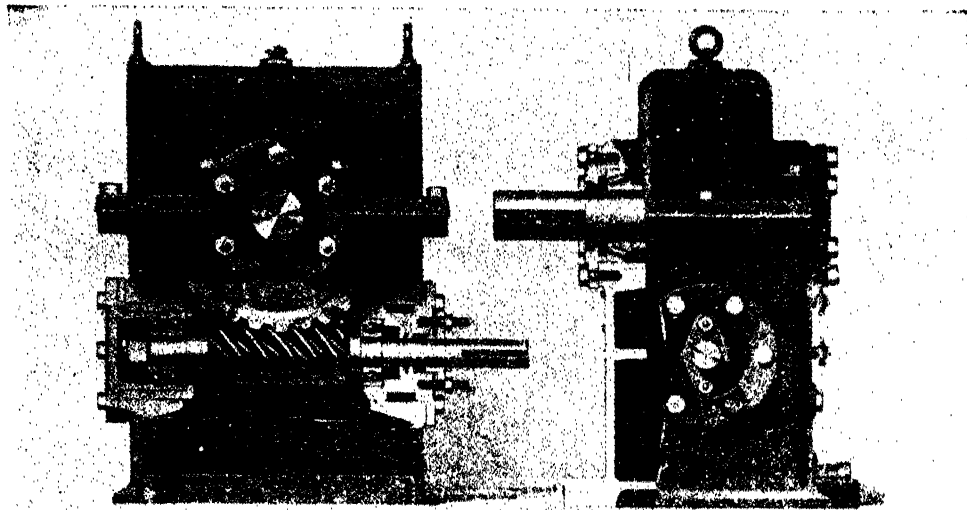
Worm Gear Reducer. *Courtesy of Cleveland Worm and Gear Co.
